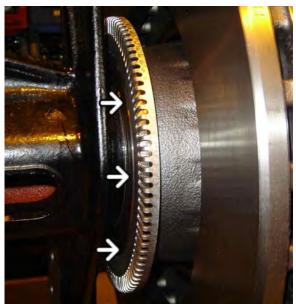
NO PLAY BETWEEN THE BEARING AND THE SPINDLE SHOULDER
